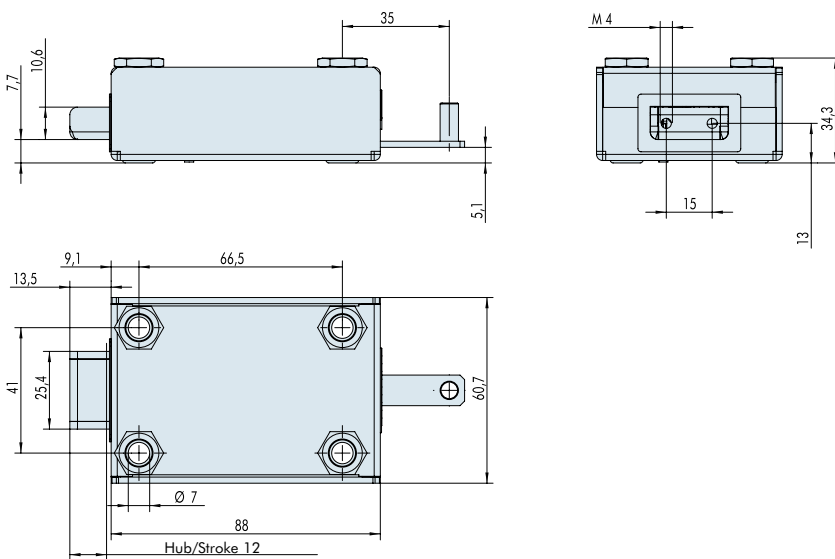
Installation dimensions Remote 7219 with optional mech. opening
